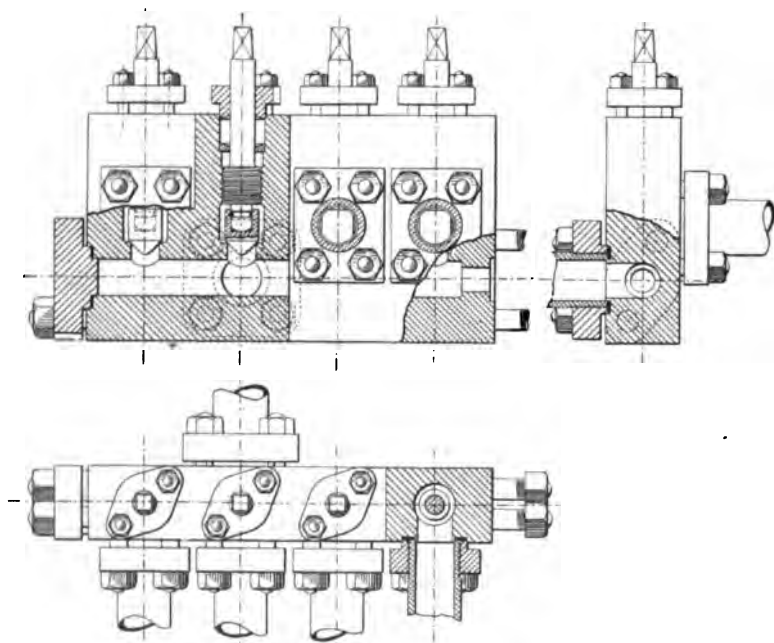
FORGED STEEL AMMONIA MANIFOLD VALVE.
